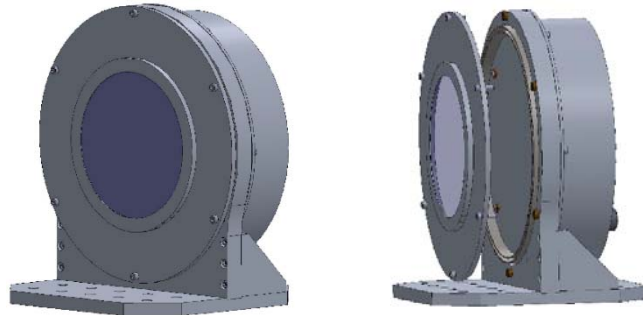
Left: USPS-MA with 100-mm-diameter assembly. Right: Exploded view for clarity of assembly.
